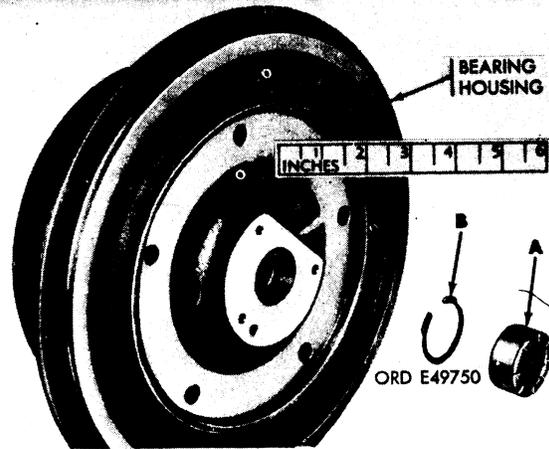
REMOVING OR INSTALLING COMPRESSOR END SLEEVE BEARING AND RETAINING RING - TURBOCHARGERS 10912638 AND 53591-C-139552.
